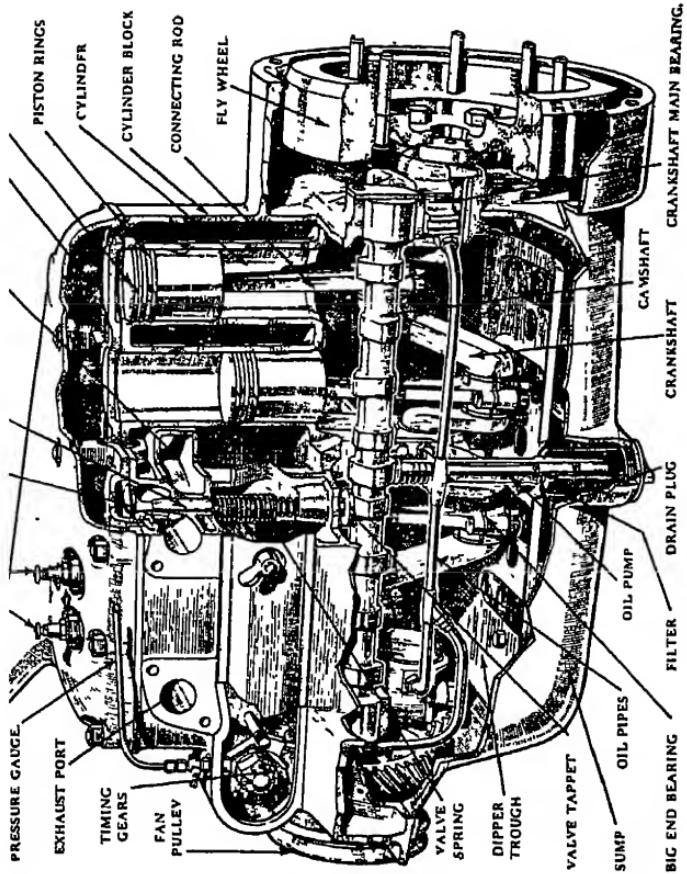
MORRIS FOUR-CYLINDER ENGINE
